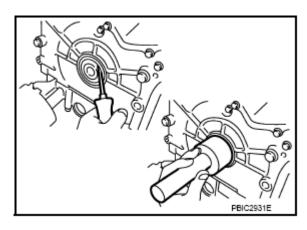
Removing Front Oil Seal Using Tool Courtesy of NISSAN NORTH AMERICA, INC.
